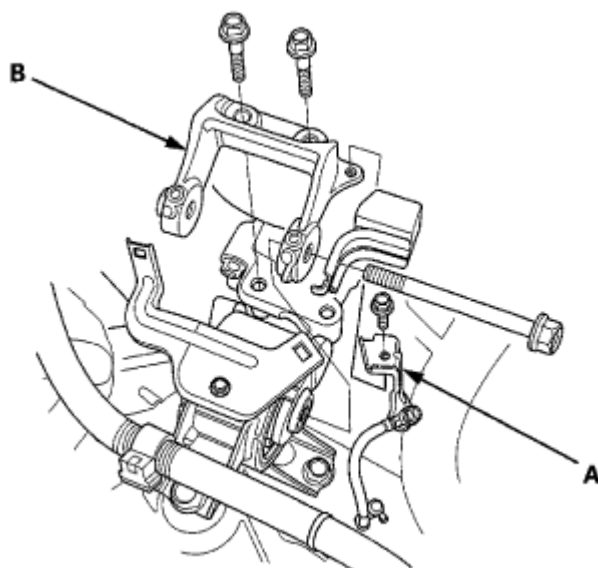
Identifying Ground Cable Bracket And Side Engine Mount Bracket
